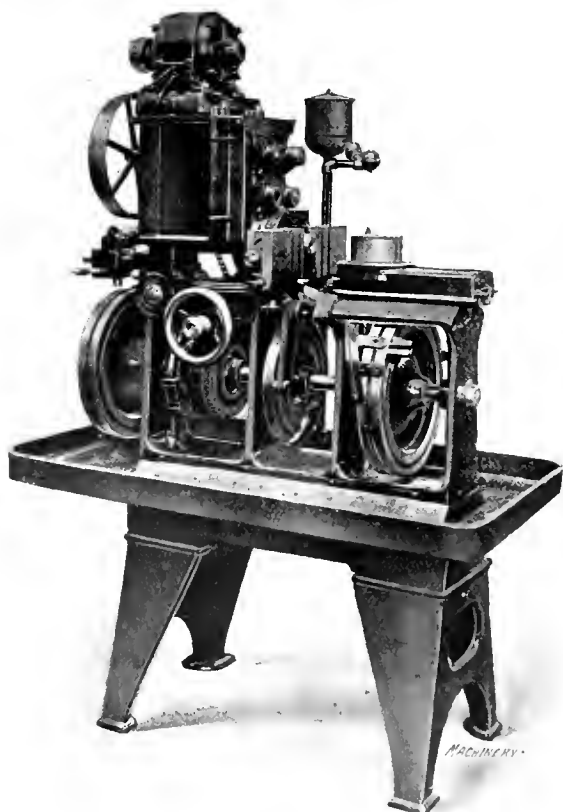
Front View of Motor-driven Automatic Screw Machine, built by the F. E. Wells & Son Co., Greenfield, Mass.
